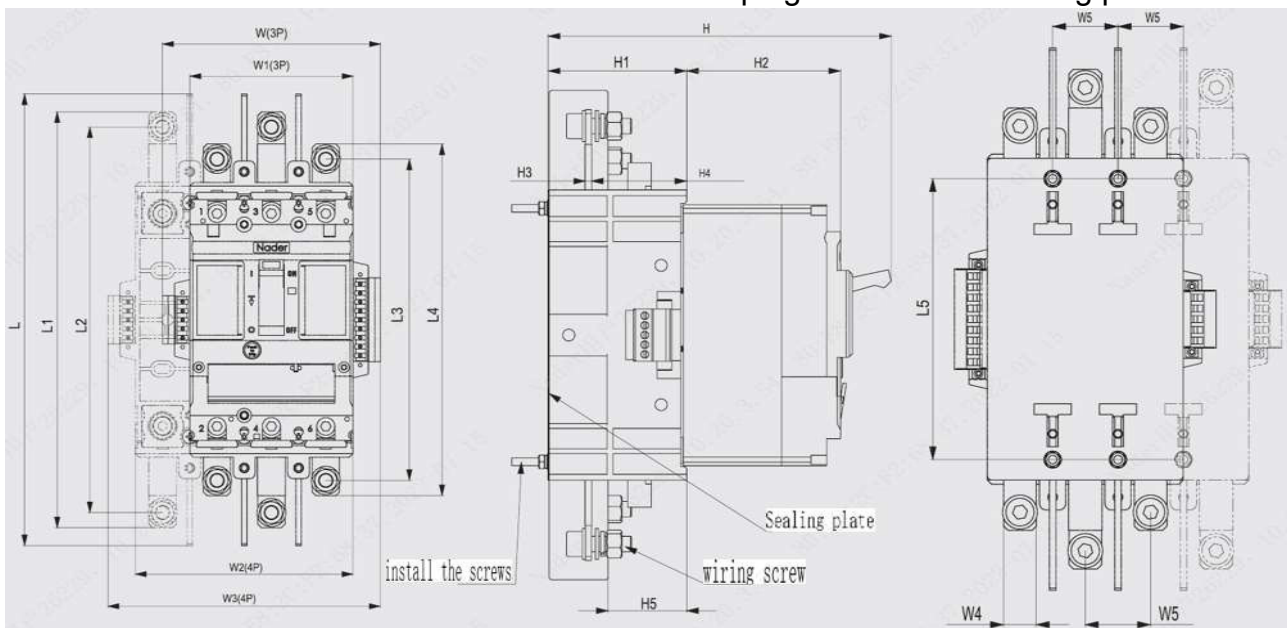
3P、4P Outline dimensions of plug-in front board wiring products
